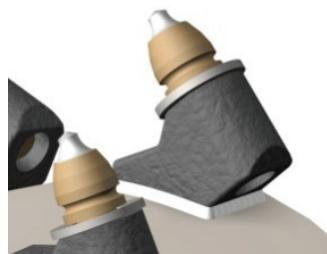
Cutter holder on the shroud of the milling head, welded
